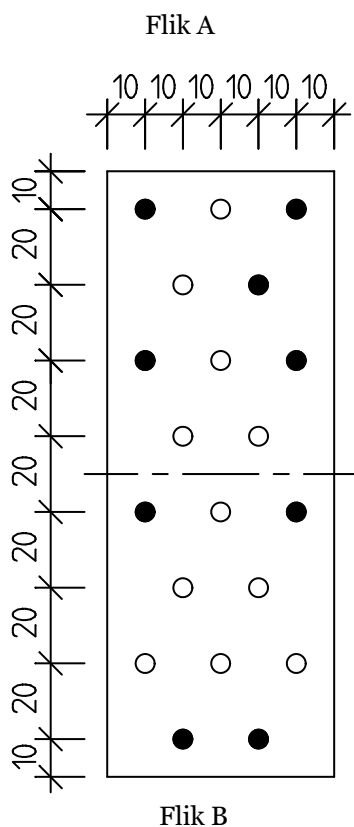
Dimensions of Angle Bracket type 1/80x80x2,0/2,5x60
